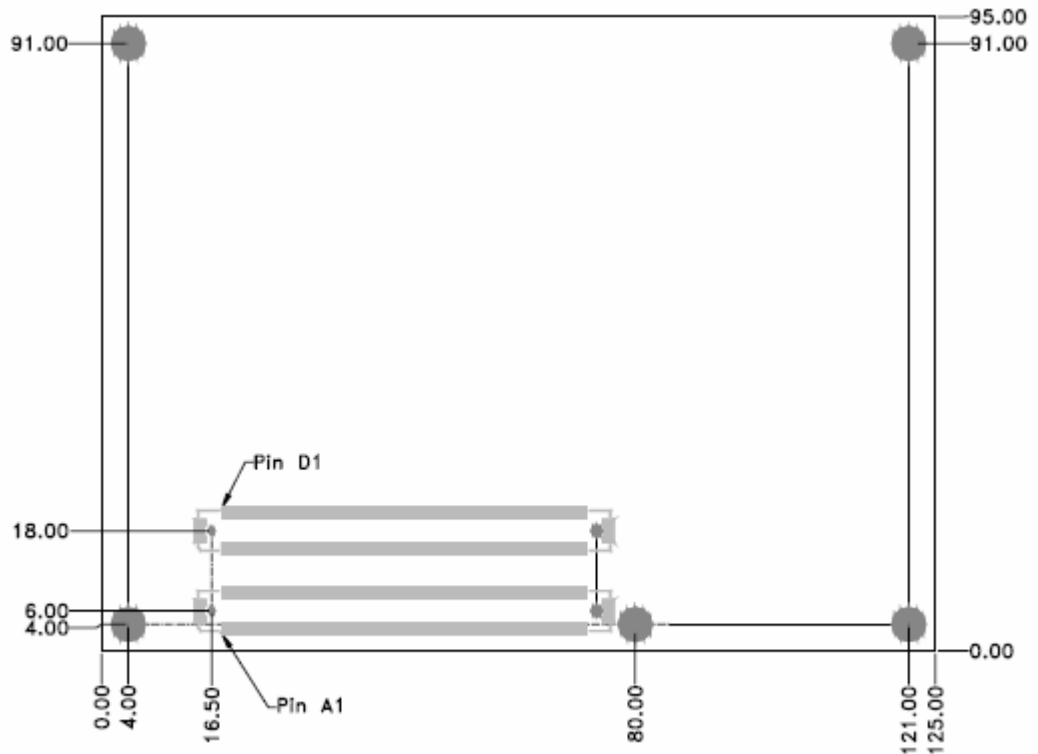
SOM-Express Module Board Mechanical Dimensions
